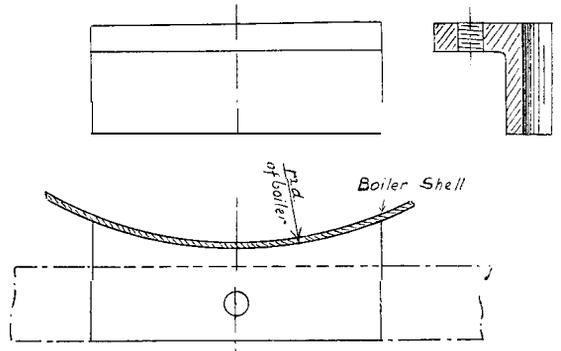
CASTING TO SECURE THE BOILER TO THE MAIN FRAME.
